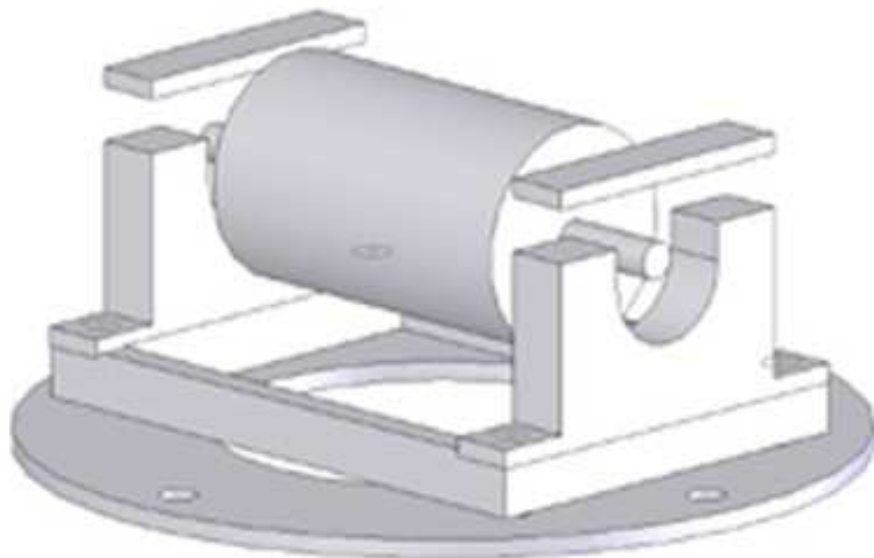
Connection ring, base frame, roller support apparatus and embedded bearing with the roller. All material are should be from insulating HDPE.
